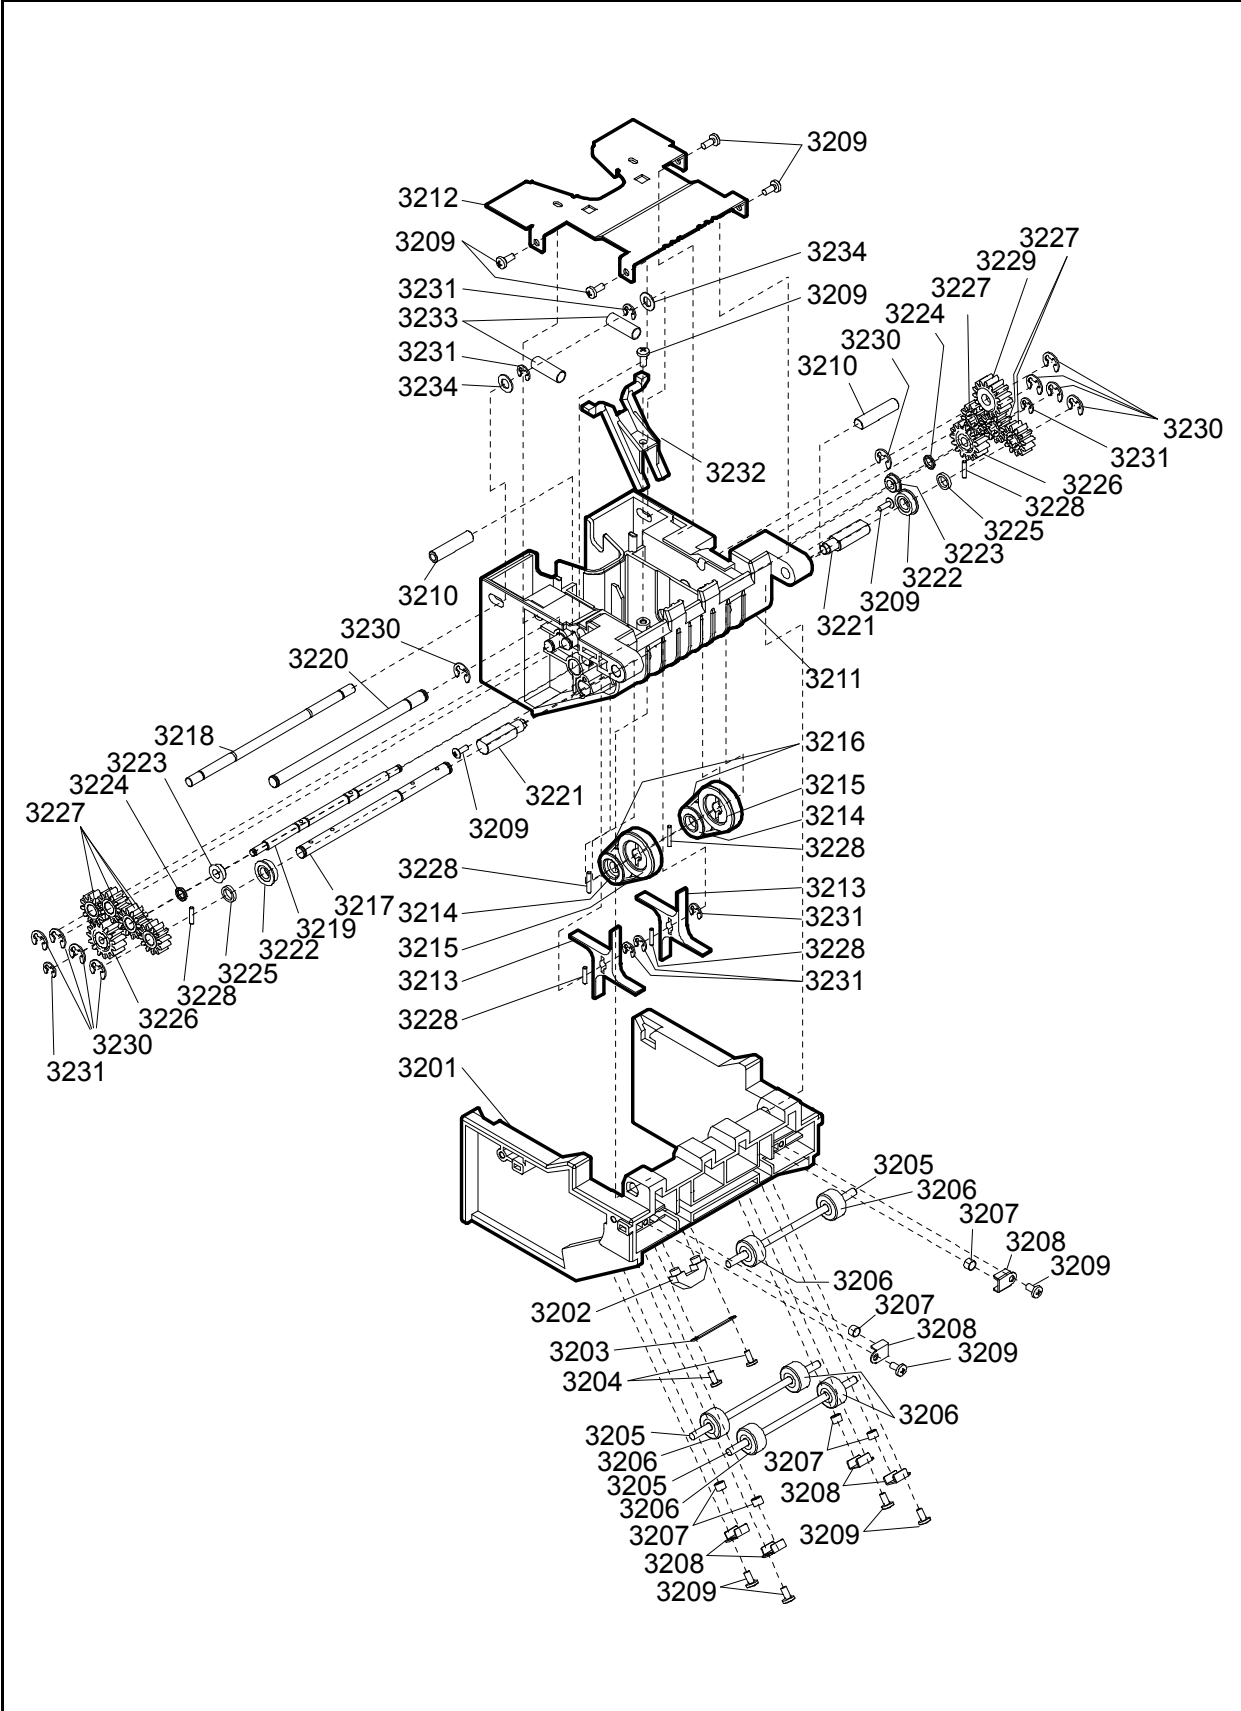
TBV FLD/GLD Frame Unit Exploded View 2
